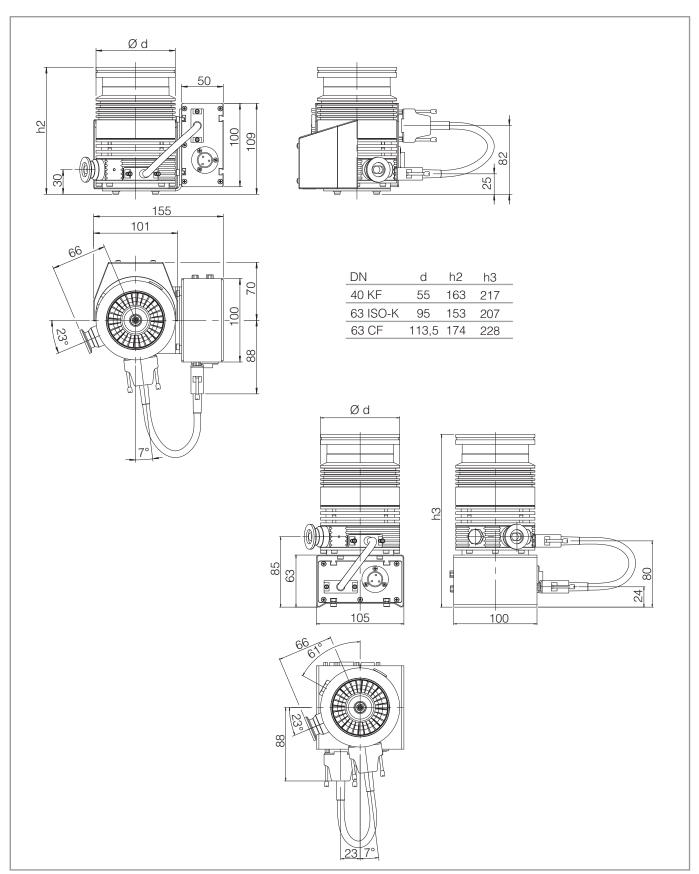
Dimensional drawings for SL 80 pumps (combination examples); dimensions in mm
